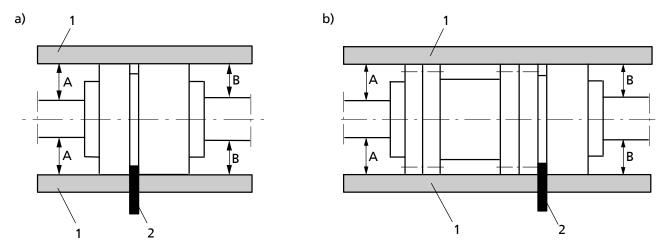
Checking the coupling alignment: Coupling without spacer sleeve (a) or Coupling with spacer sleeve (b)
